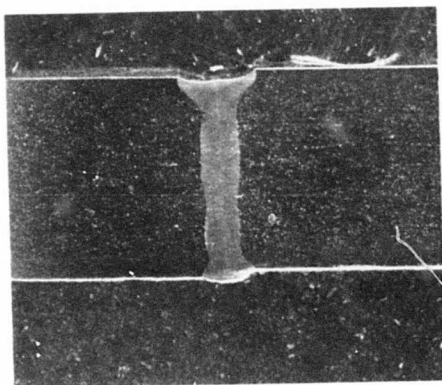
WELDED FATIGUE SPECIMEN SECTIONS (TITANIUM ALLOY)
